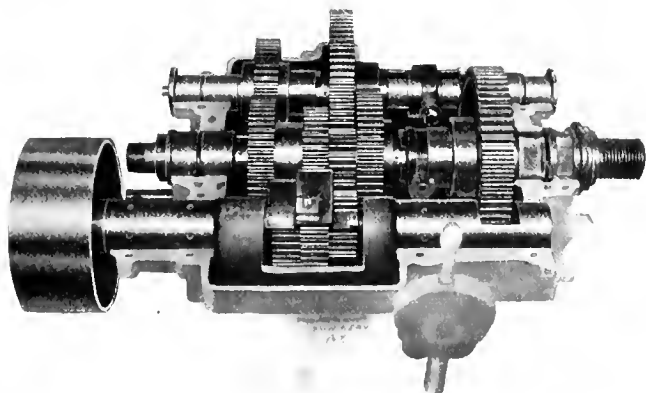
The Head-stock of Fig. 1, with the Cover removed
